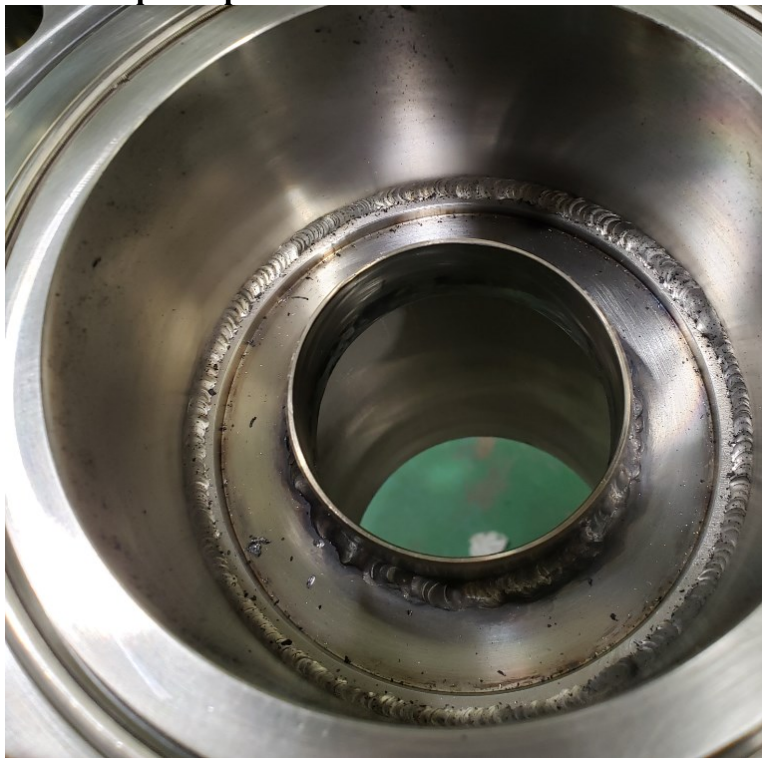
Pump debris well after water testing campaign. No graphite debris was evident below the debris well. A complete description of debris well can be found in [1], [2]
